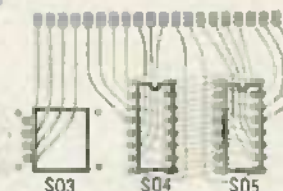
THE B-SOCKET BOARD parts placement. Note that SO3 is a small solderless bread-board socket.
